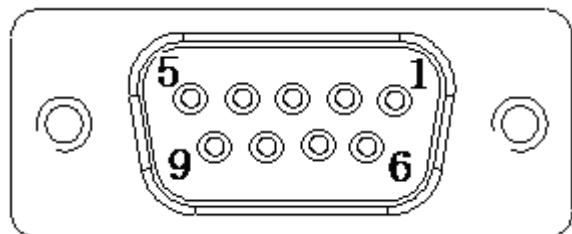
Soldering terminal of XS1 Serial interface plug (looking from the soldering terminal)
